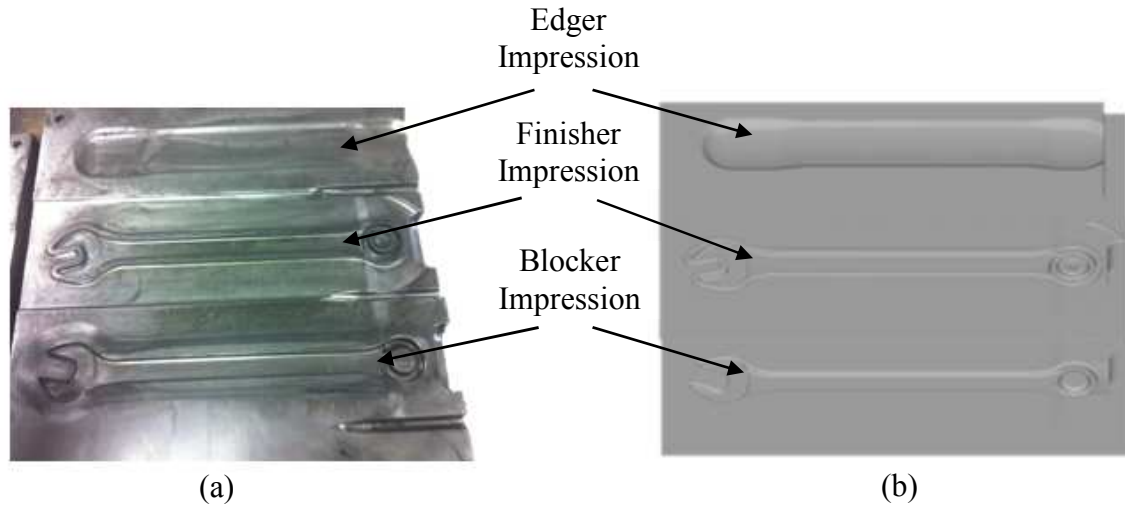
Bottom die block of the existing wrench forging process. (a) Actual die block used at GBDF and (b) Three dimensional geometry representation used in DEFORM
